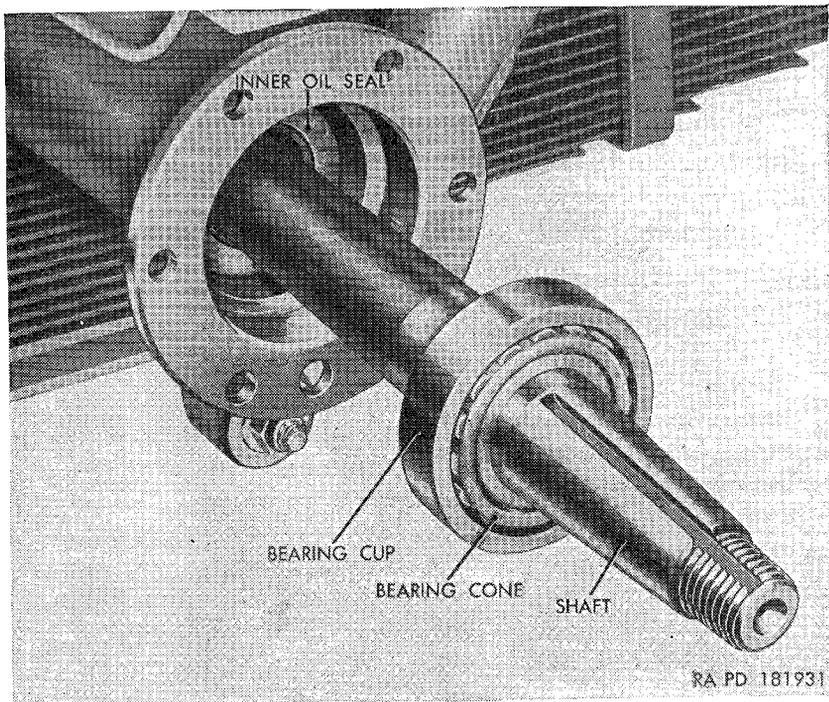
Rear axle shaft with bearing assembly—partially withdrawn from housing.
